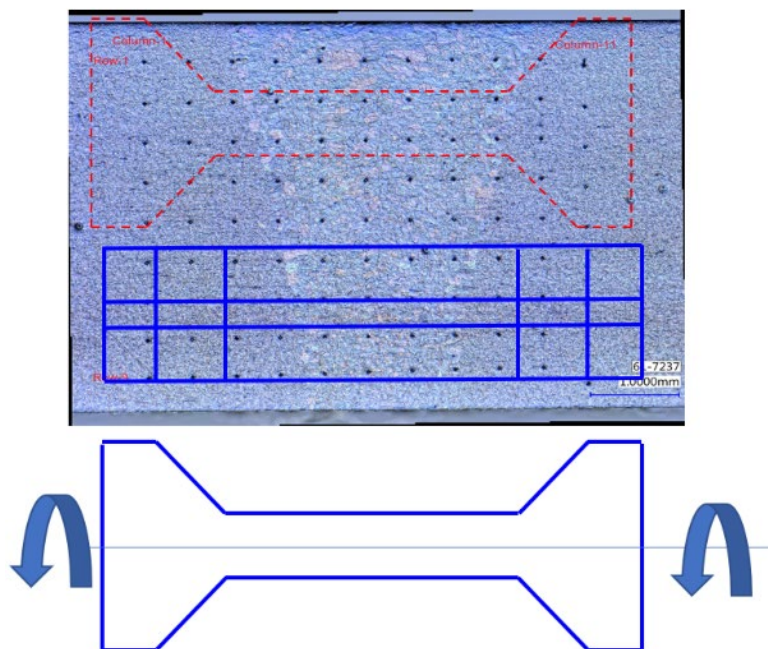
Location and orientation of additional specimens (blue outline) cut from the weldment bottom portion.
